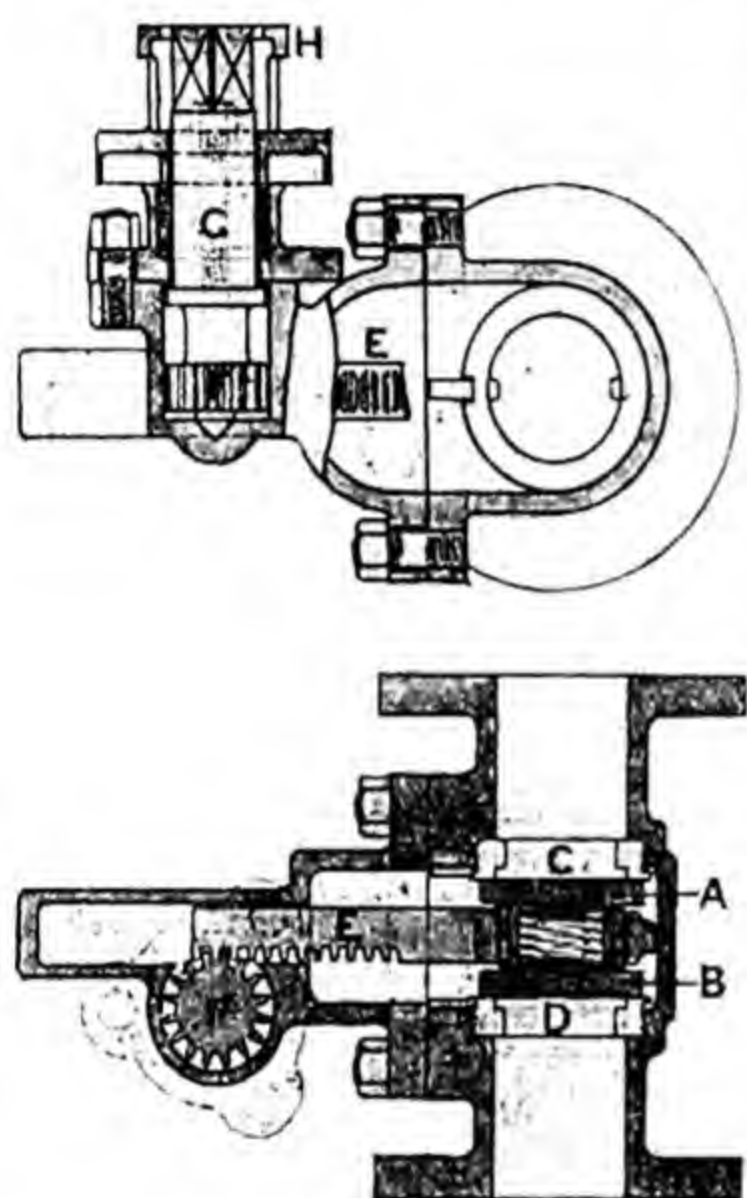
Sectional elevation and plan of Hopkinson's blow-off valve.
